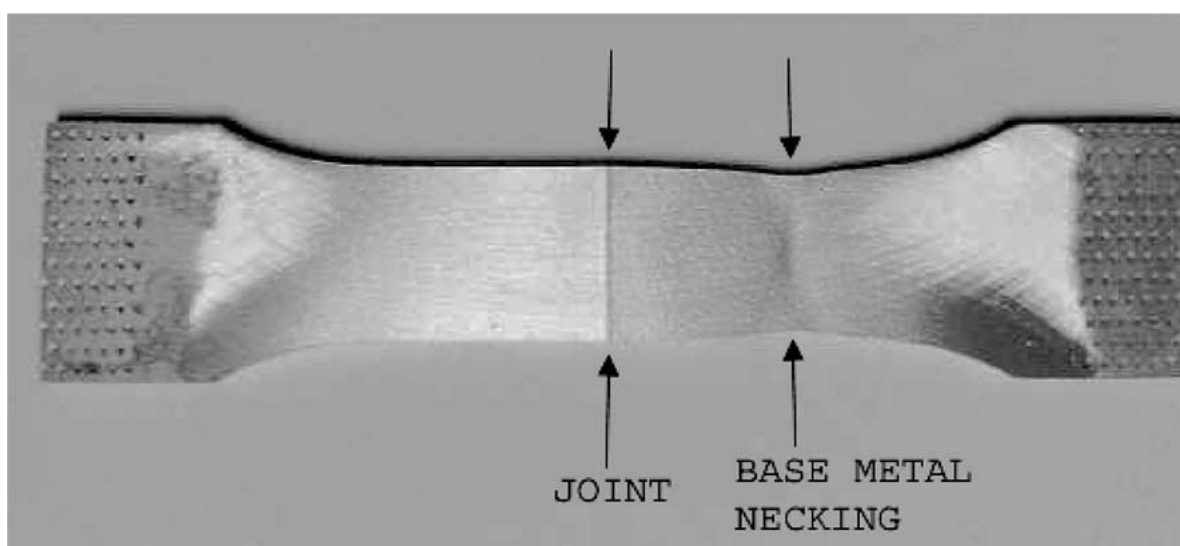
Typical failure mechanism of a 10 min. brazed joint with a joint thickness of 0.00 mm, showing base material yielding and necking.
